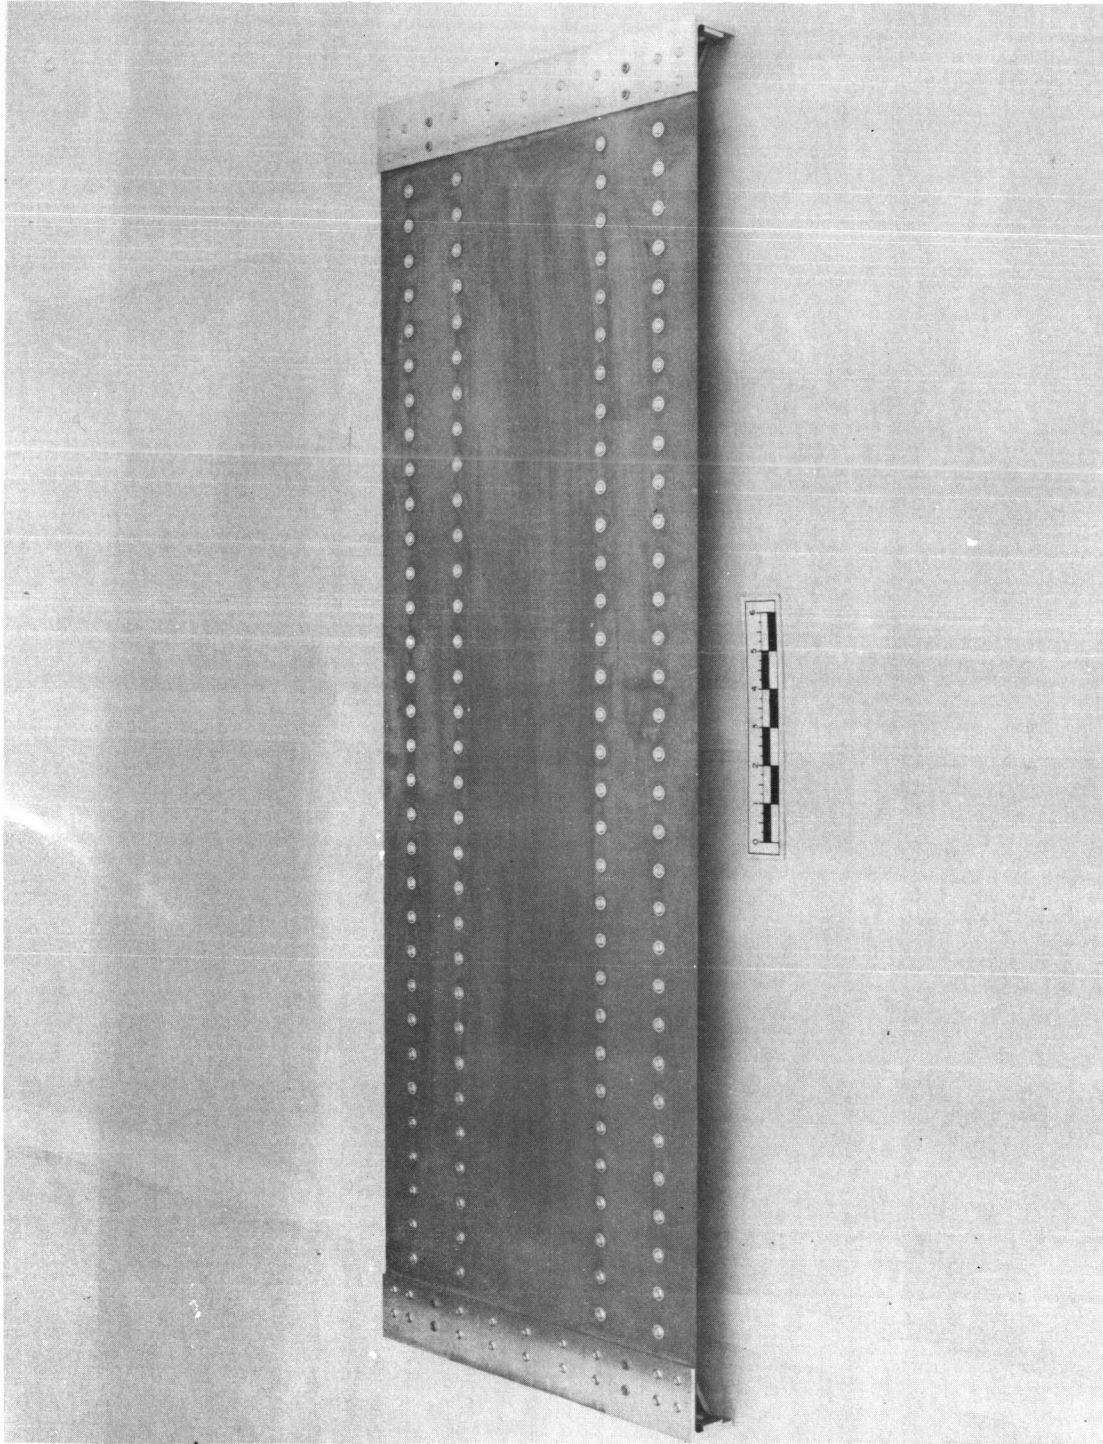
ASSEMBLED BERYLLIUM TEST PANEL -
